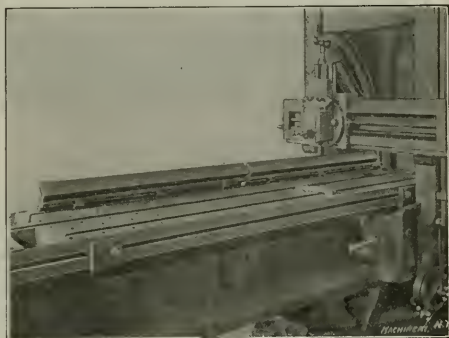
Back Stops Used for Holding the Brackets Bottom up.
